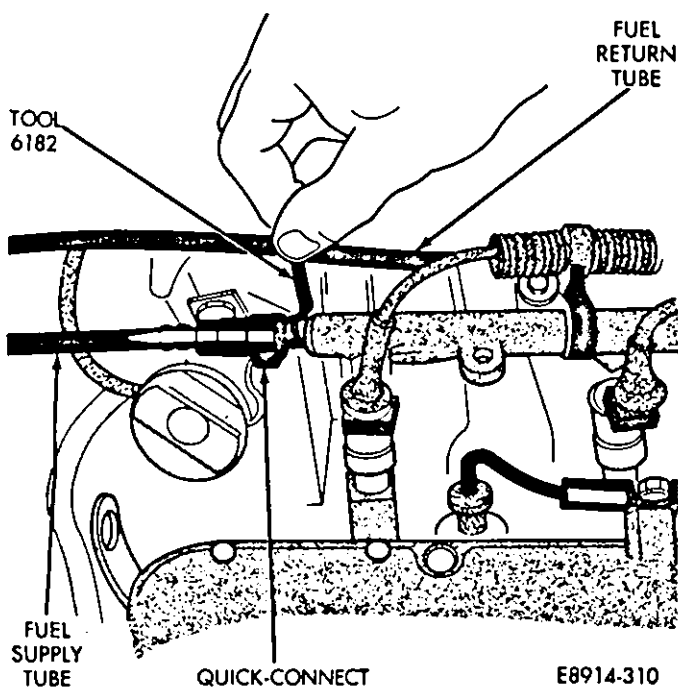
Disconnect Fuel Lines Using Disconnect Tool 6182
